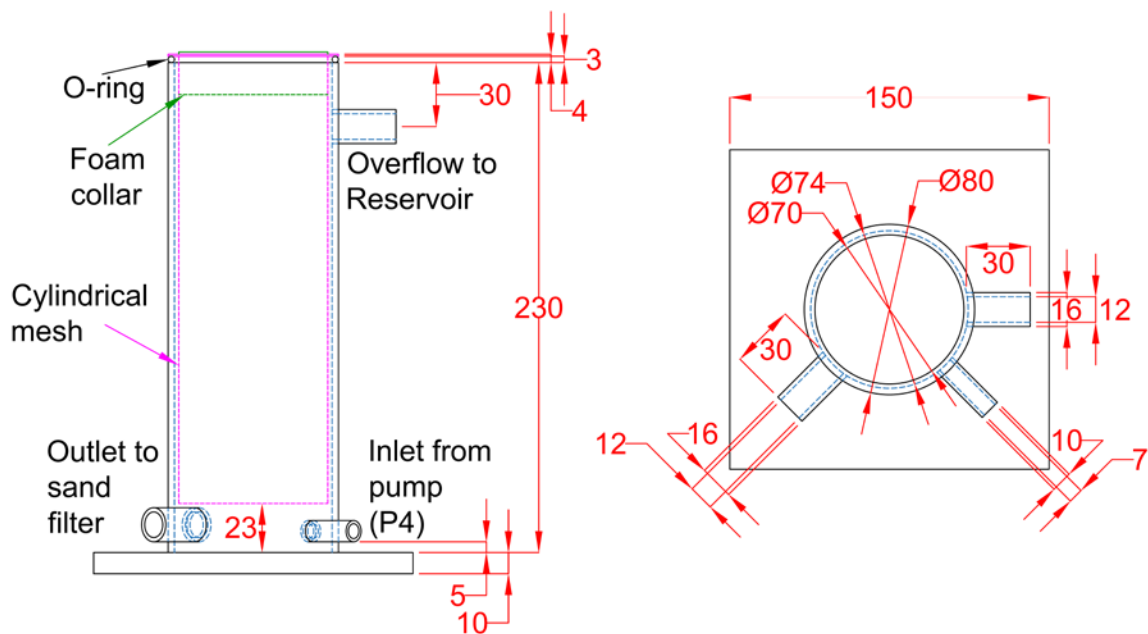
Detailed drawing of the plant vessel. Side view on left, top view on right.
